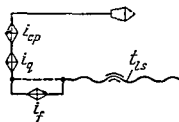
Schematic diagram of the feed gear train in an engine lathe
